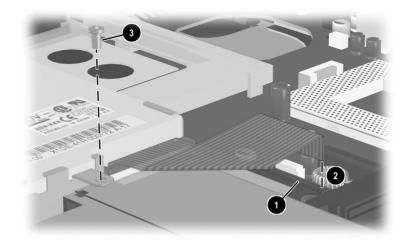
Disconnecting the Diskette Drive Cable and Removing the Diskette Drive Screws
